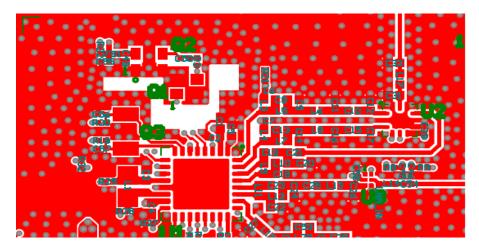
LR1110 Thermal Insulation on PCB Top Layer
